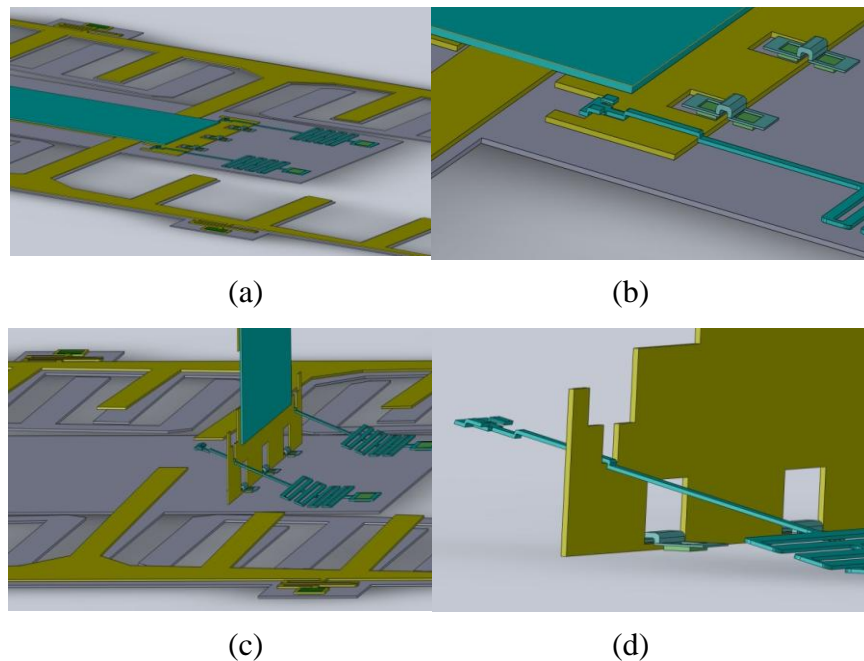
Structure before and after assembly (a) Structure before assembly; (b) enlarged view of structure before assembly; (c) Structure assembled at the vertical position; (d) enlarged view of structure assembled at the vertical position;
